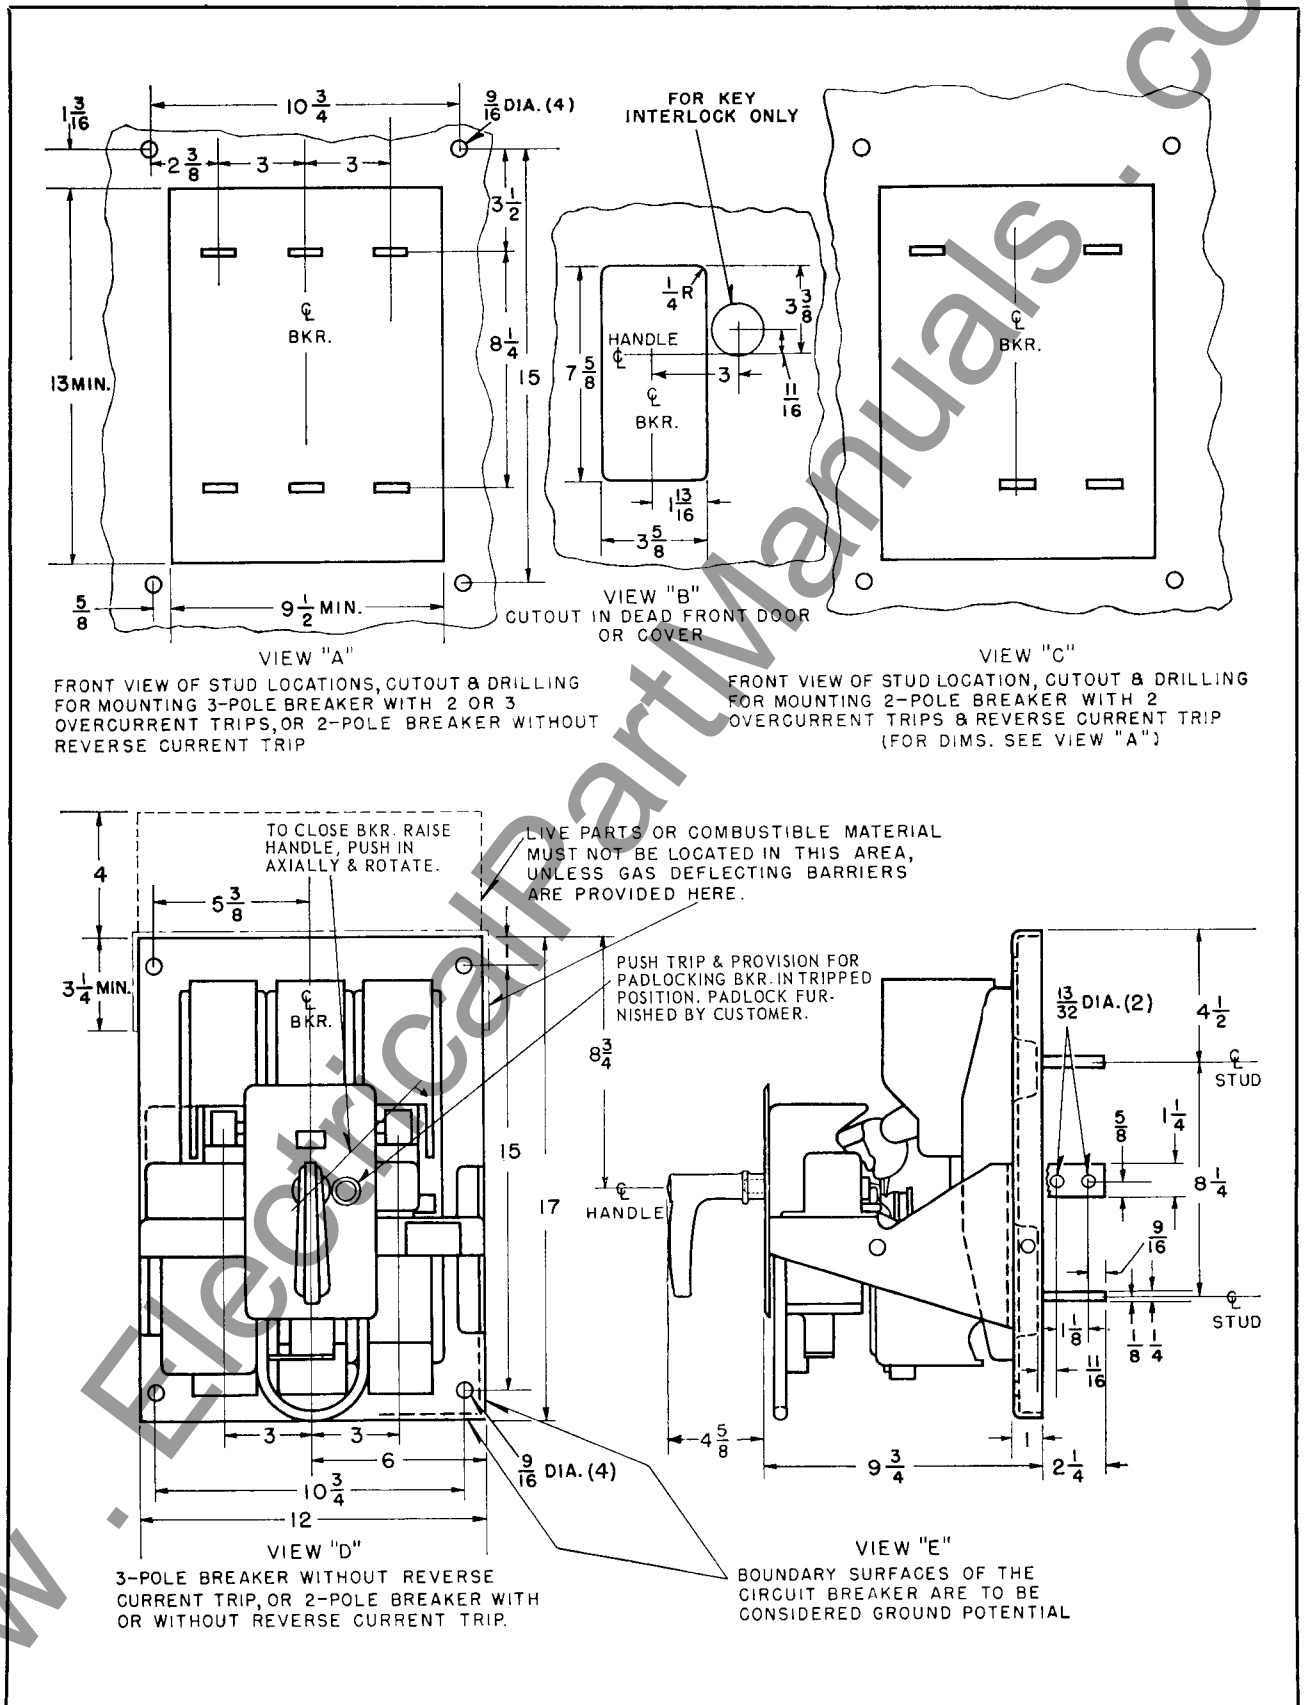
DB-15 Fixed Outline Dimensions and Mounting Details
